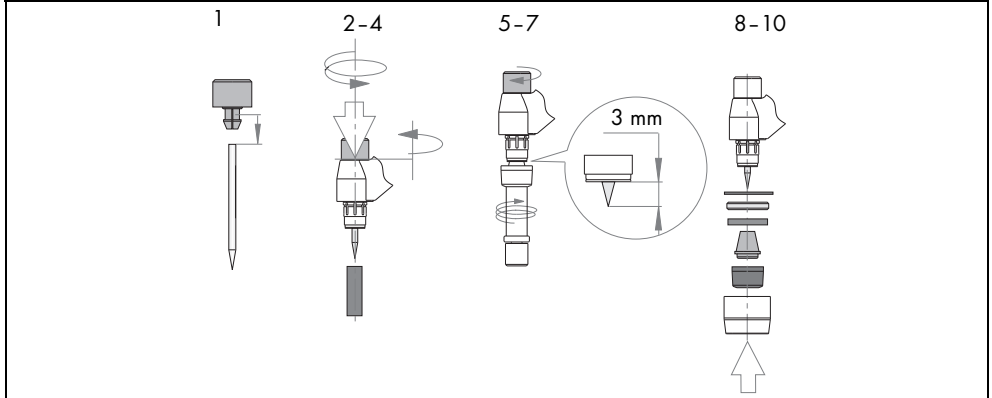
Steps for setting up the ABIPLAS® WELD 250 CT20 torch body
